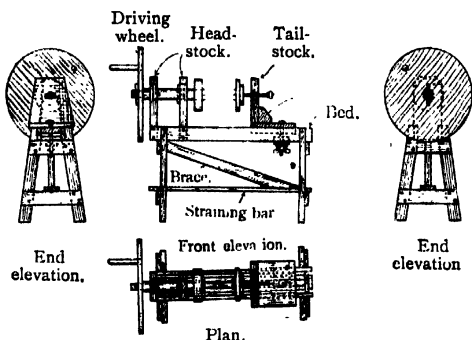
WINDING MACHINE FOR ELECTRICAL REELS.
